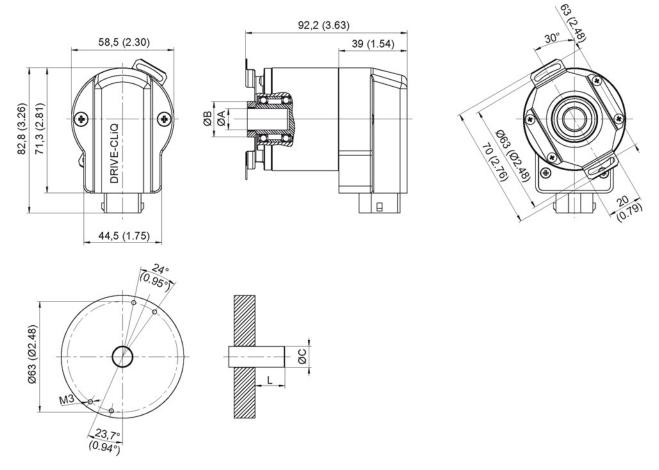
Dimension drawing of hollow shaft, all data in mm and (inches)
